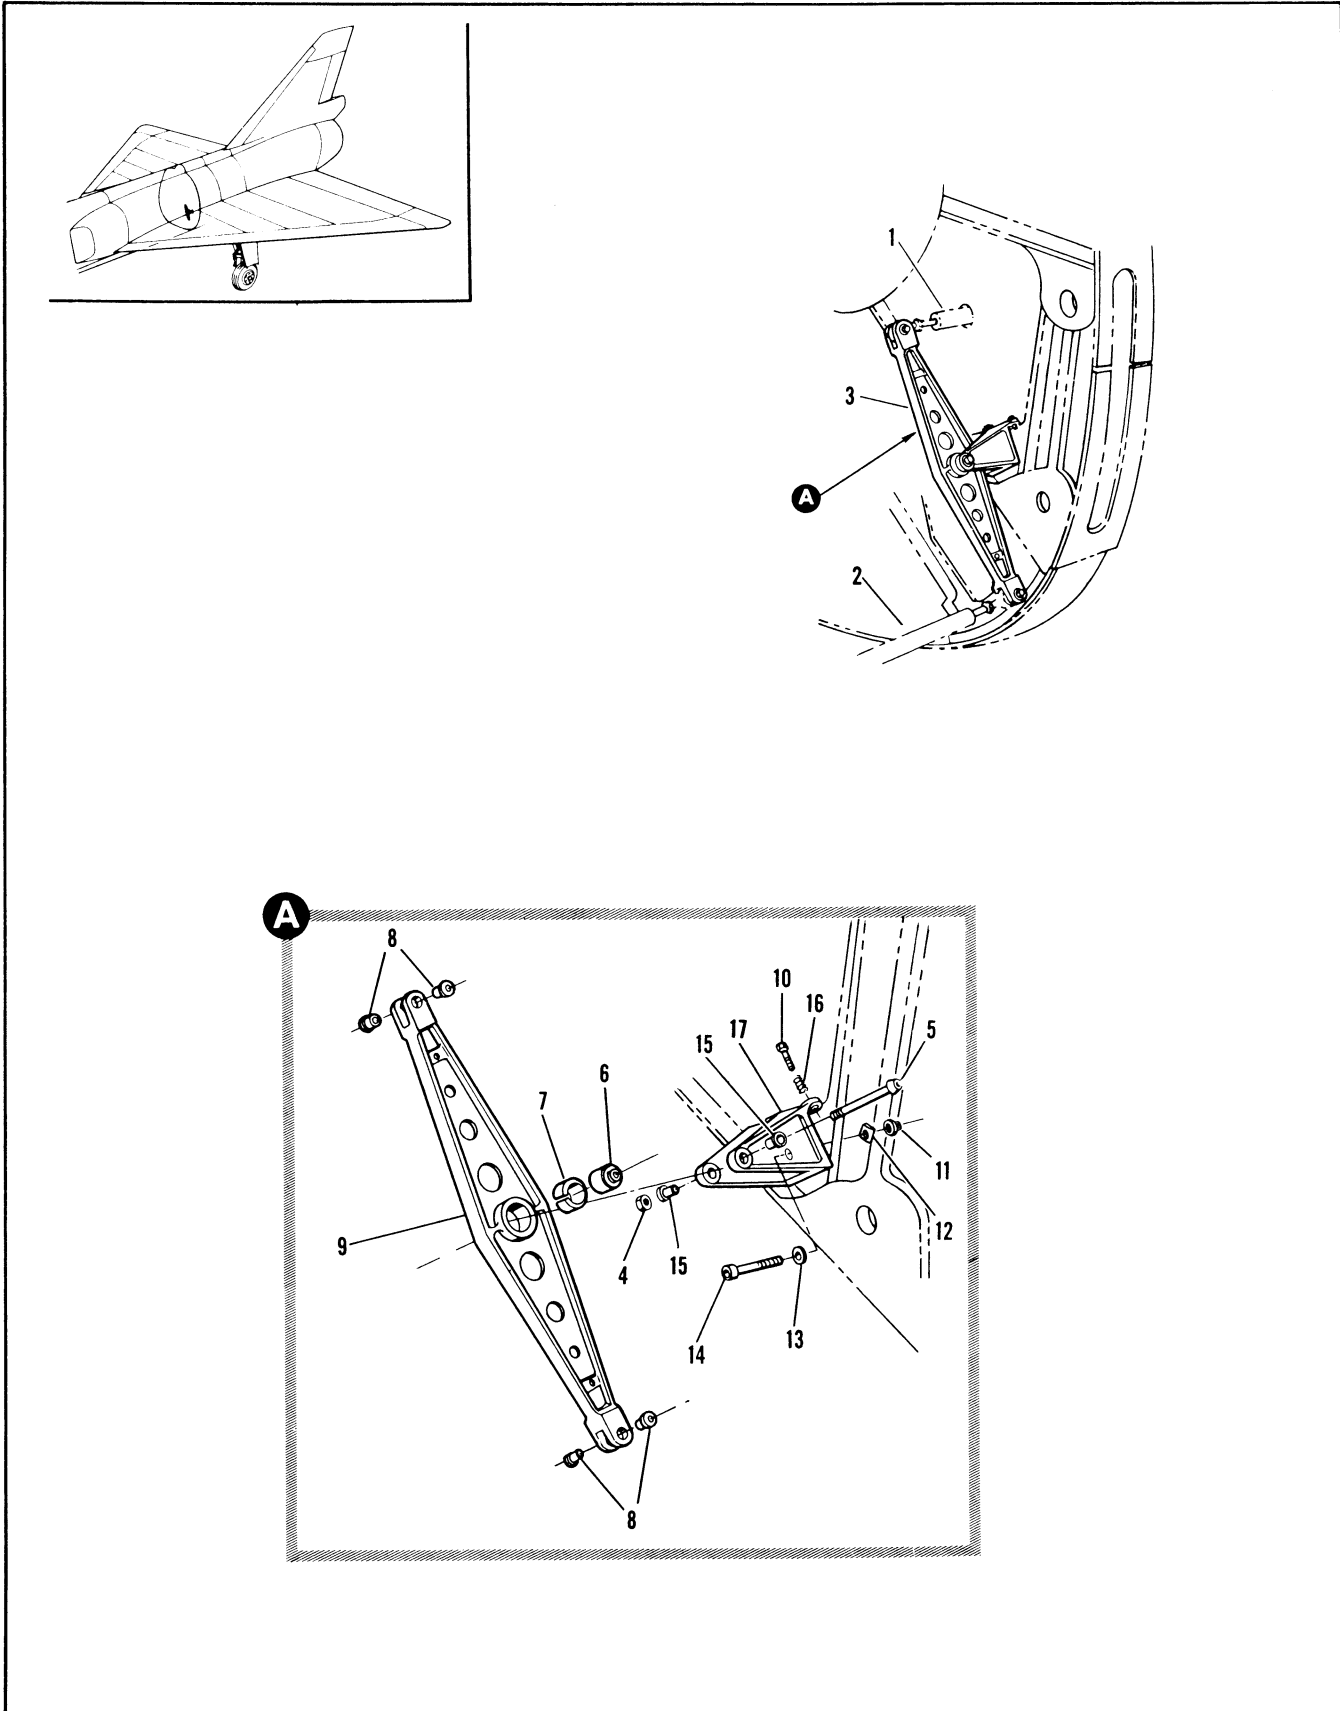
Elevator LH Bell Crank Installation Sta 426
